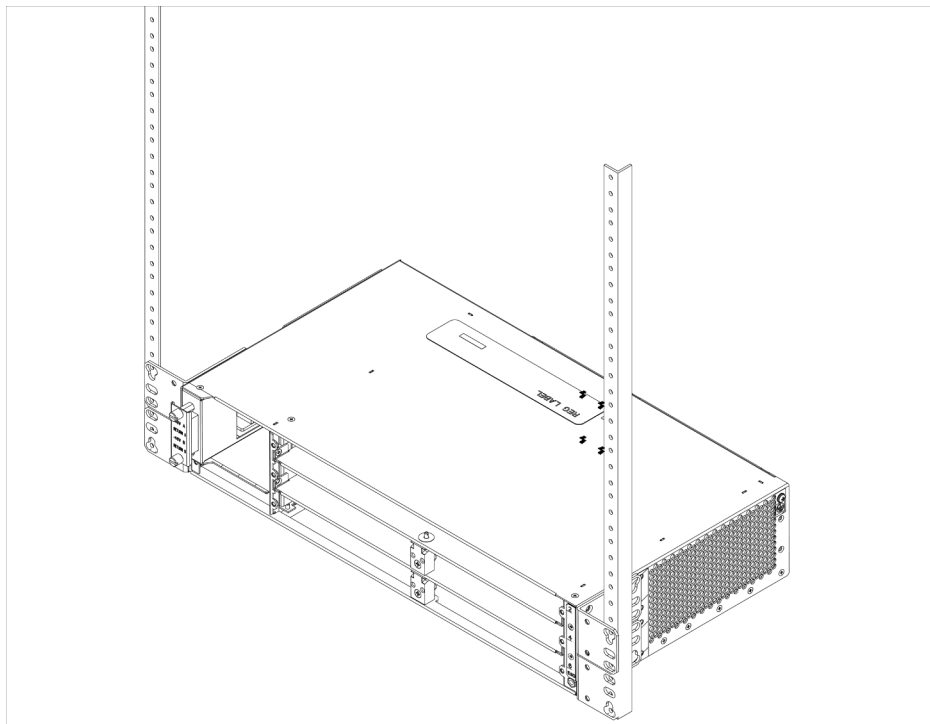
BTI 7060 500-mm (21-inch) ETSI rack, front-mount position with cover and bracket assembly
